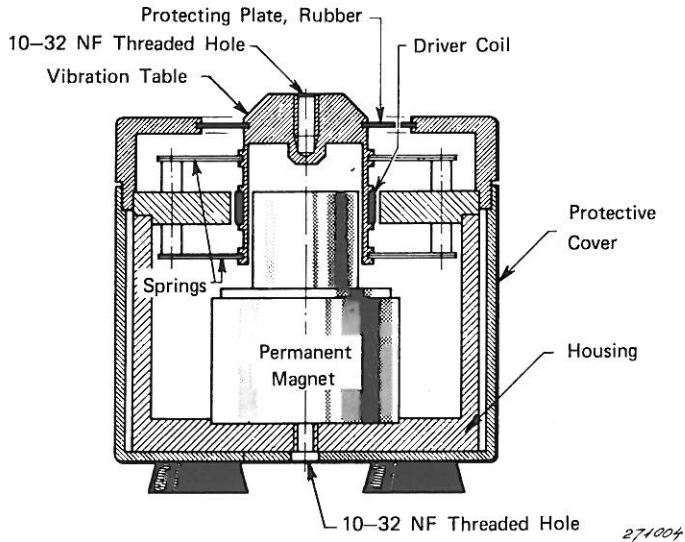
Sectional drawing of the Mini-Shaker Type 4810.
